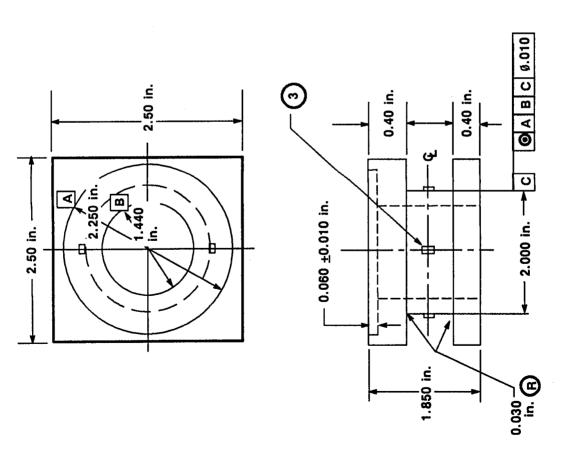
C-Fixture Assembly to Mount Micrometer and Steel Post
